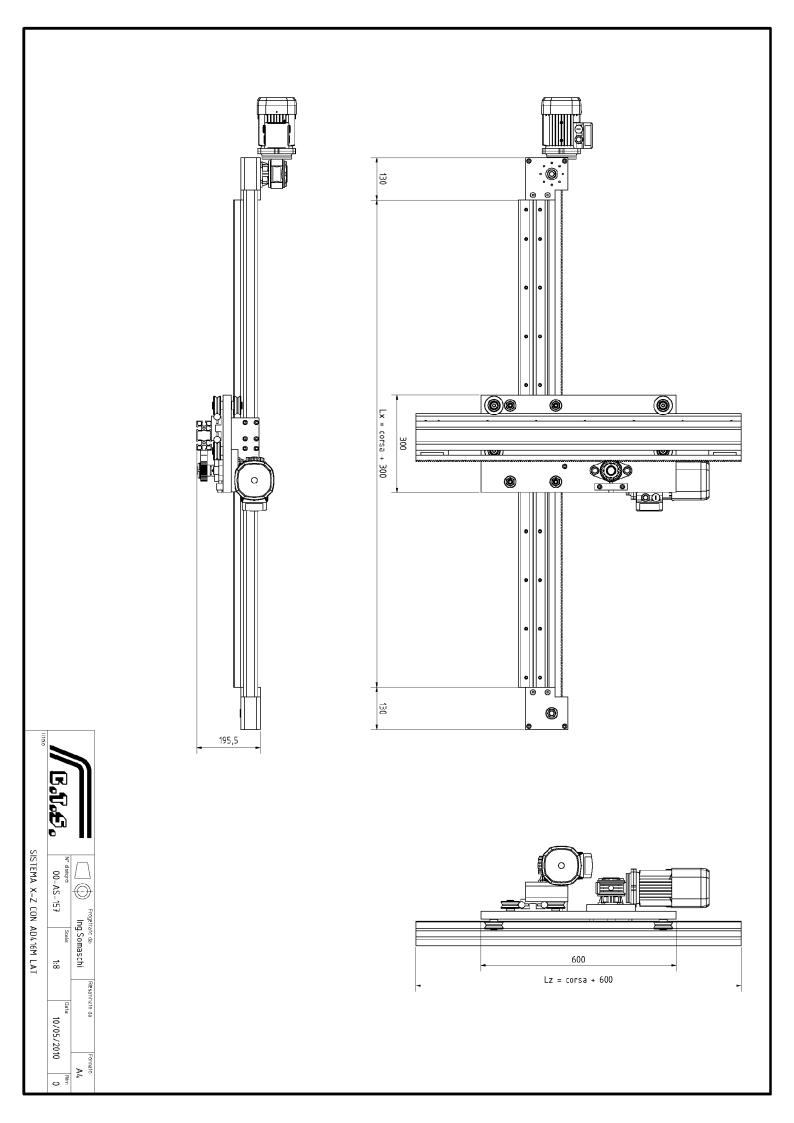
AS-157 MIDDLE VERSION WITH AD416 GUIDES
